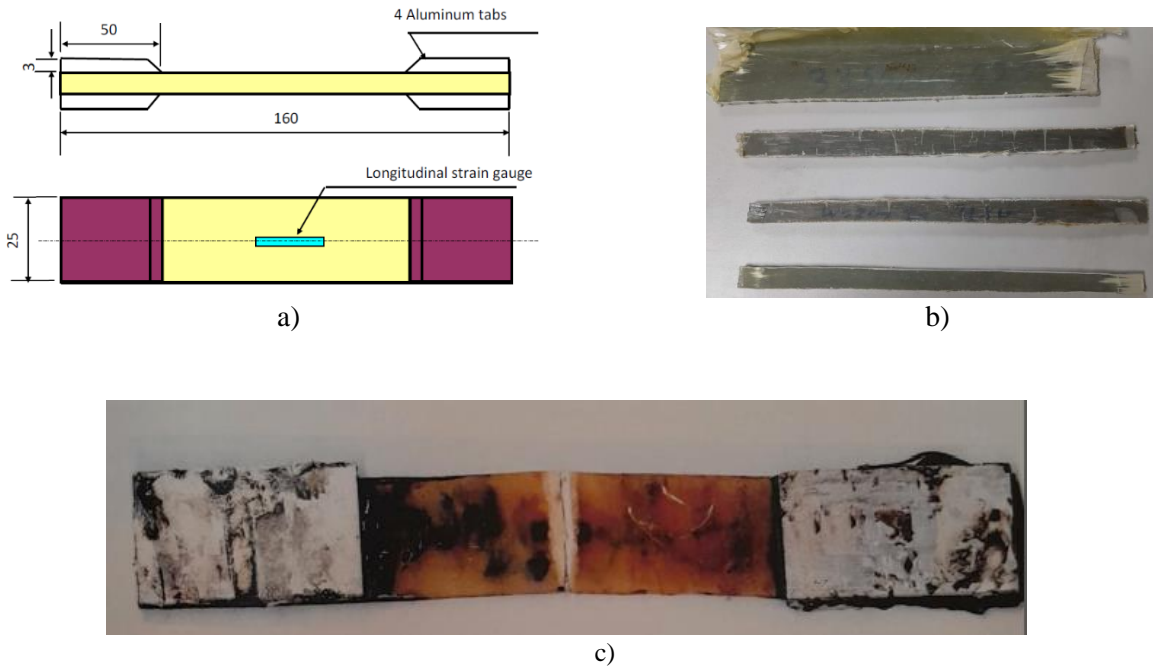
a) schematic dimensions of the tension test specimen as specified by ASTM D3039. b) sample after cut to dimensions for compression test c) sample after tensile test
